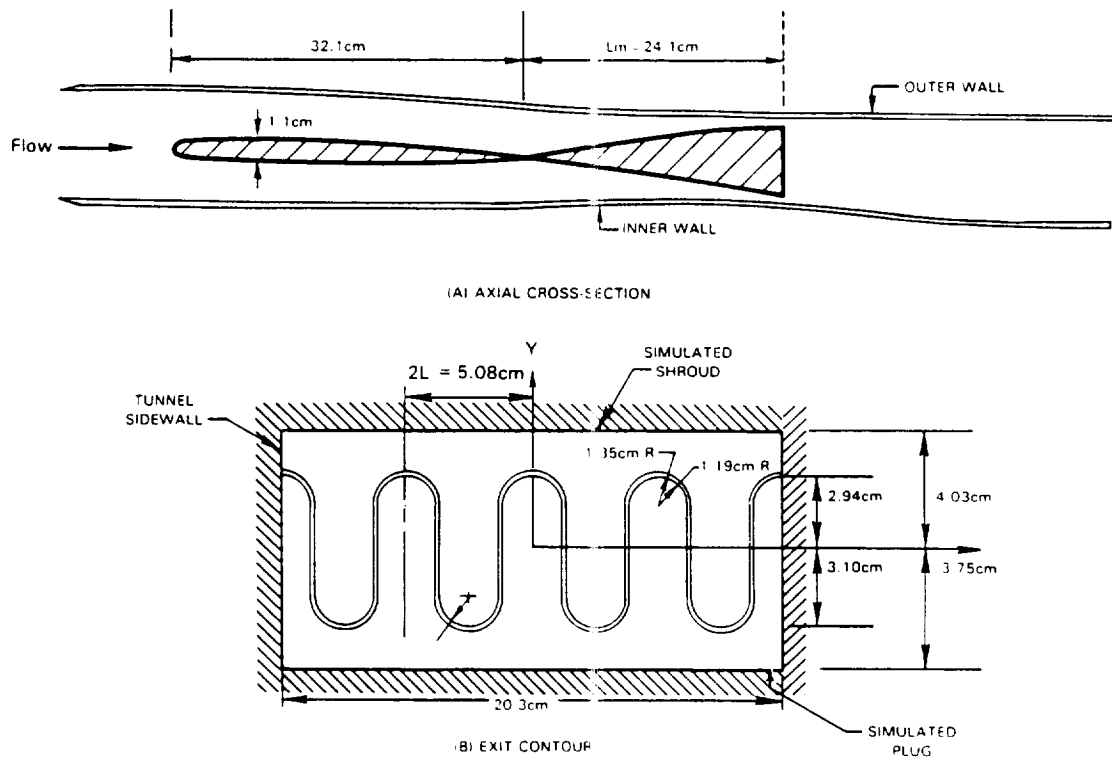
Advanced High Penetration Mixer Section and Exit Plane Contour
